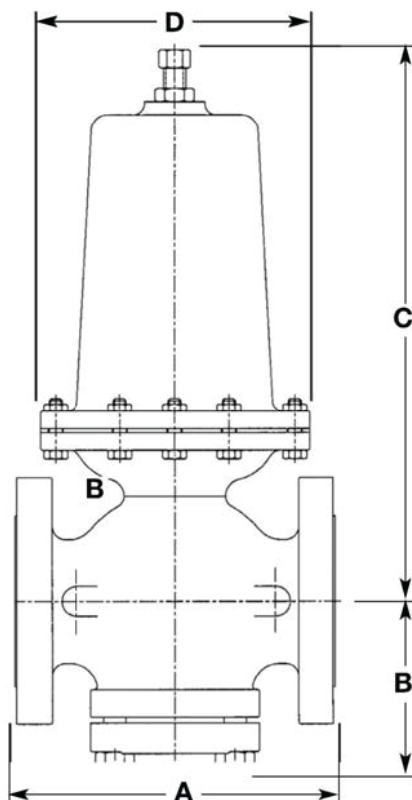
Type D34 Water Pressure Reducing Valve Dimension
